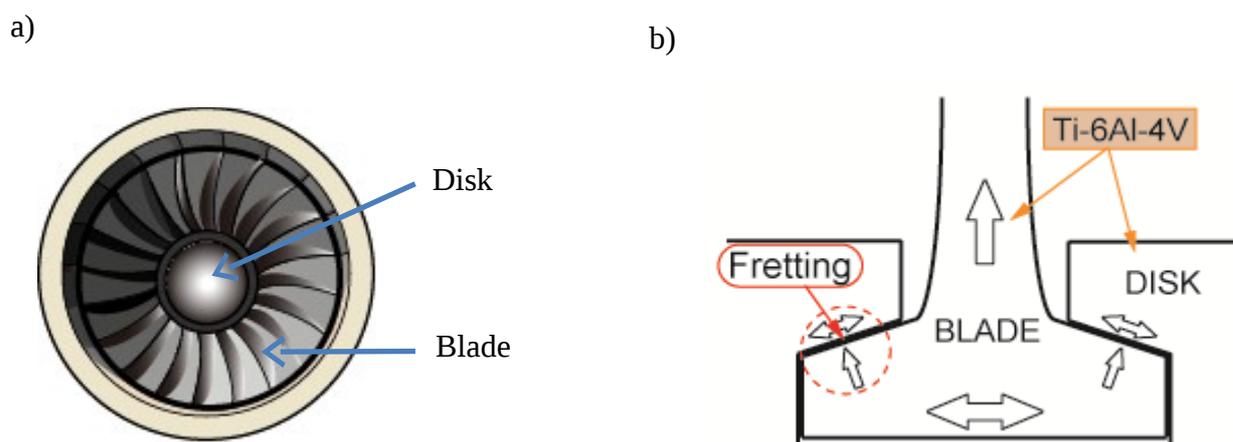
a) fan blade and fan disk related to plane reactor, b) schematic view of fretting location occurring between disk and blade.
